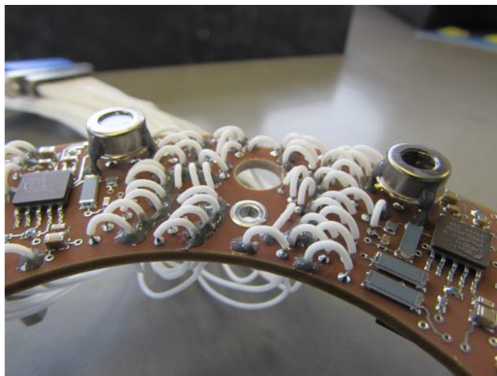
The wires staking on the EQM-PCB before reworking.
